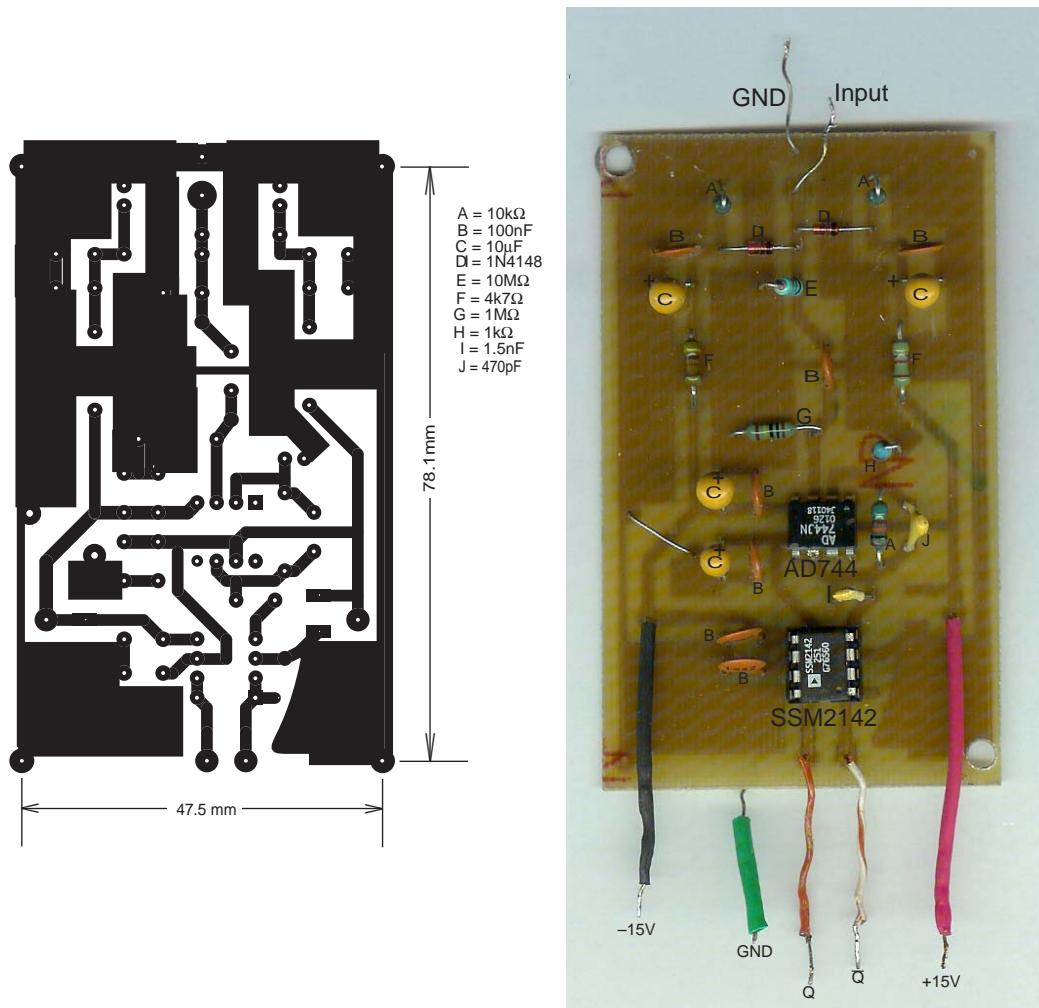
This image is the EPS (Encapsulated Postscript) version which is best for printing. It is essential to use this for printing the PCB negative to make the PCB by photo etching. On my laser printer, the two dimensions marked 78.1 mm (= 3.075 inches) and 47.5 mm (1.87 inches) are slightly (1%) larger at 79 mm and 48 mm. This is trivial for a single sided PCB with only two ICs which have only 8 pins. Note that the “land,” at 10 mm from the left hand edge and 25 mm from the bottom edge, is an “island” and must be connected to the other ground lands as shown in the image of the completed PCB as a bare wire on the upper surface of the board.
